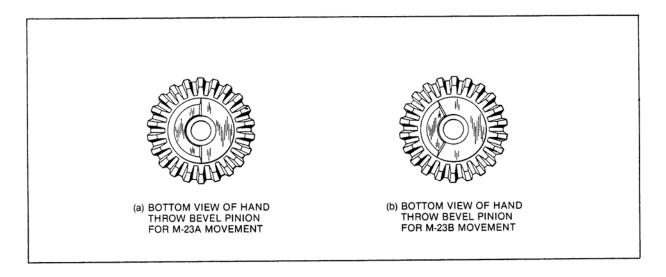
Hand-Throw Bevel Pinions for M-23A and M-23B Switch Machines
